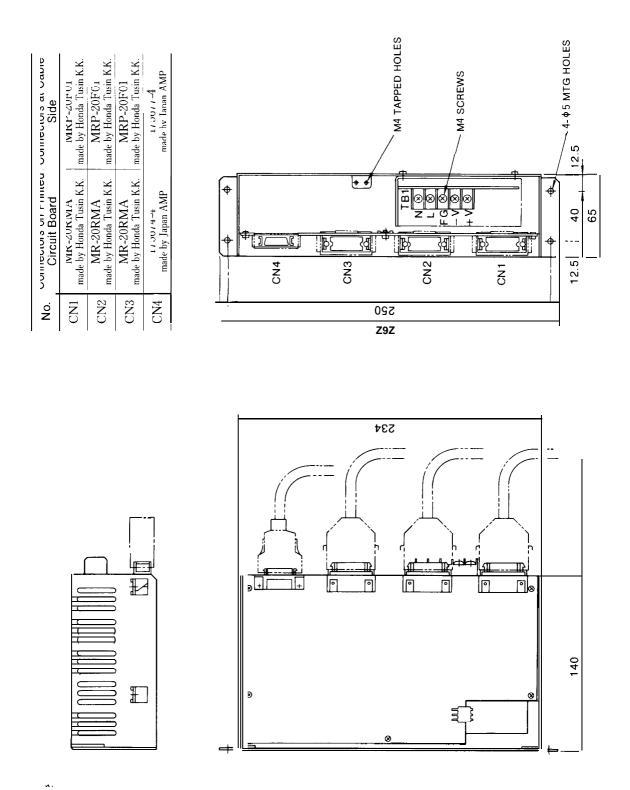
Patch Bay Unit Outside Dimensions (mm)
